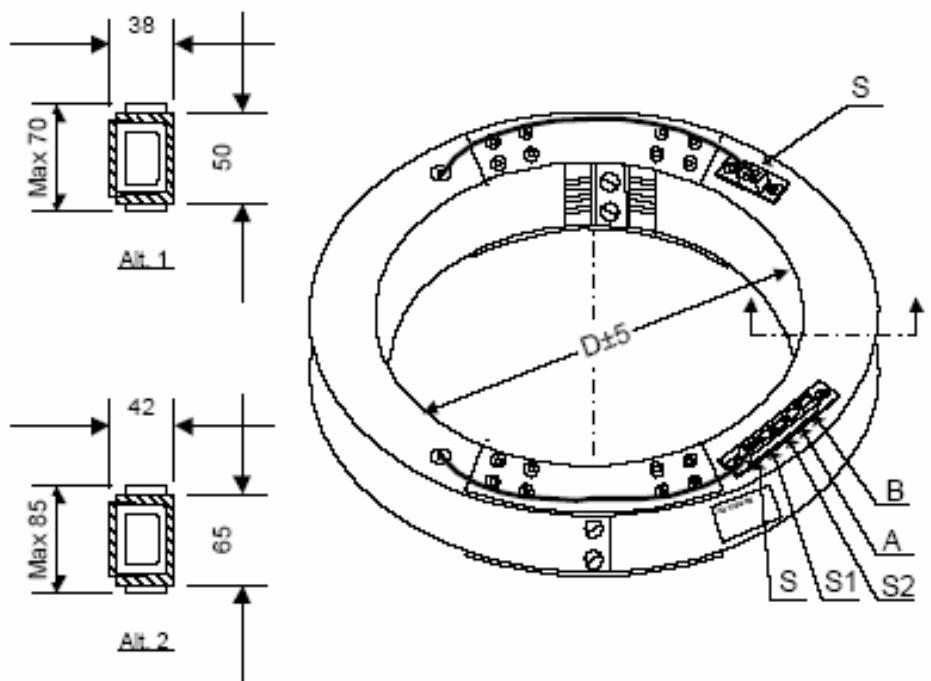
Shaft current transformer ILDD dimensions in mm.
